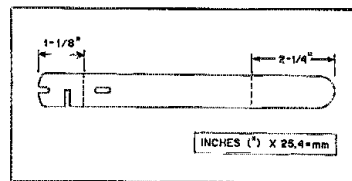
Dimensions for cutting the hacksaw blade. Grind teeth from blade.
